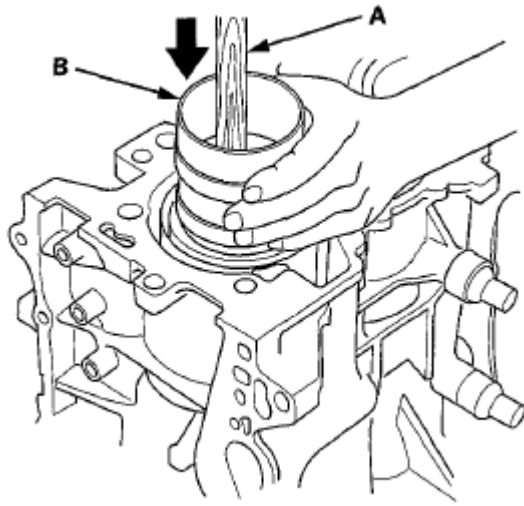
Identifying Piston/Connecting Rod Assembly Installation Position
